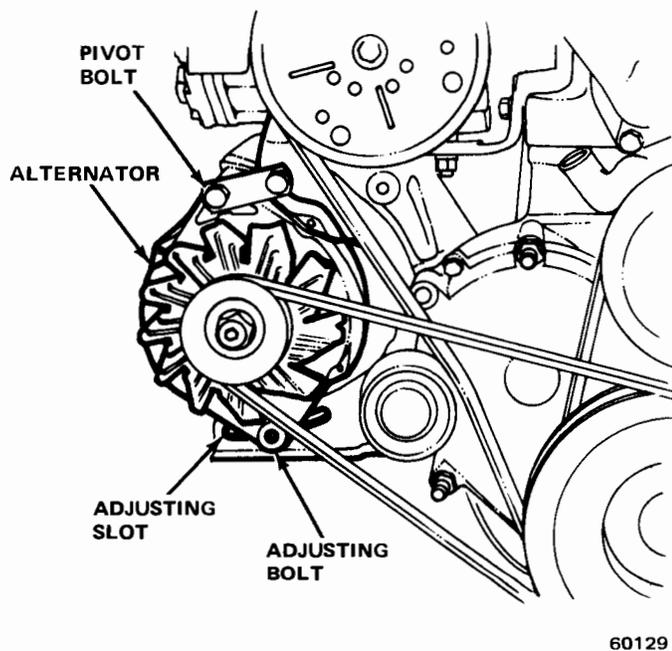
Alternator Adjustment—Six-Cylinder
